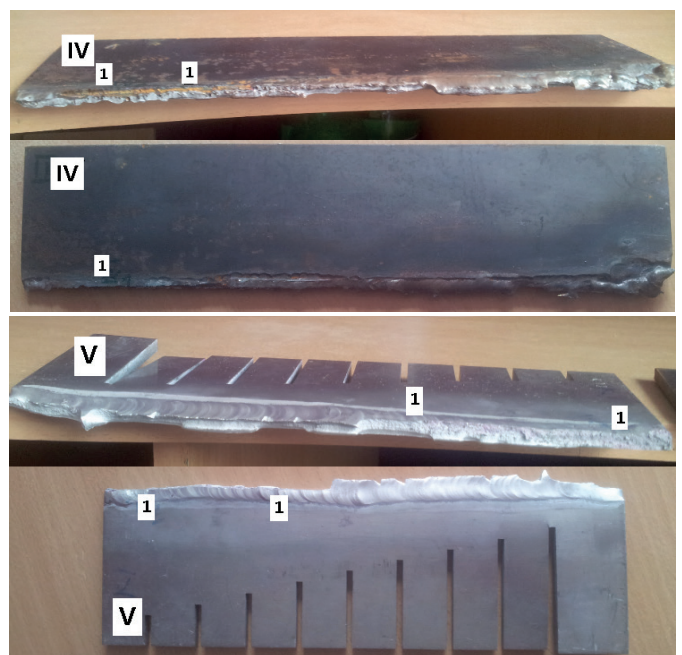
Selected butt joints after breaking in the place of cracks. In the upper portion of the photo the part of butt joint in constructional steel is visible; in the lower – that of aluminium alloy. The Roman numerals indicate the serial number of the joint while the Arabian ones – the serial number of the crack in the joint
